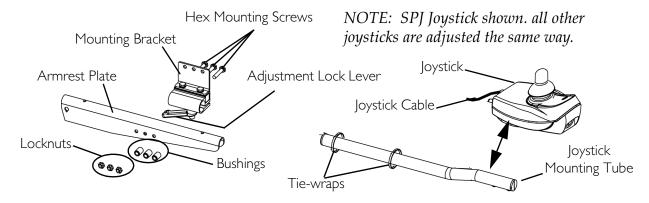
Removing/Installing the Joystick - Van Seat Models
